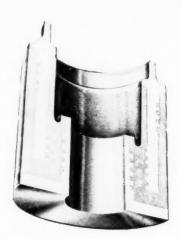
Section through Heavy Mycalex 410 Bushing with Stainless Steel Inserts Used in High-Voltage Mercury-Filled Tube
